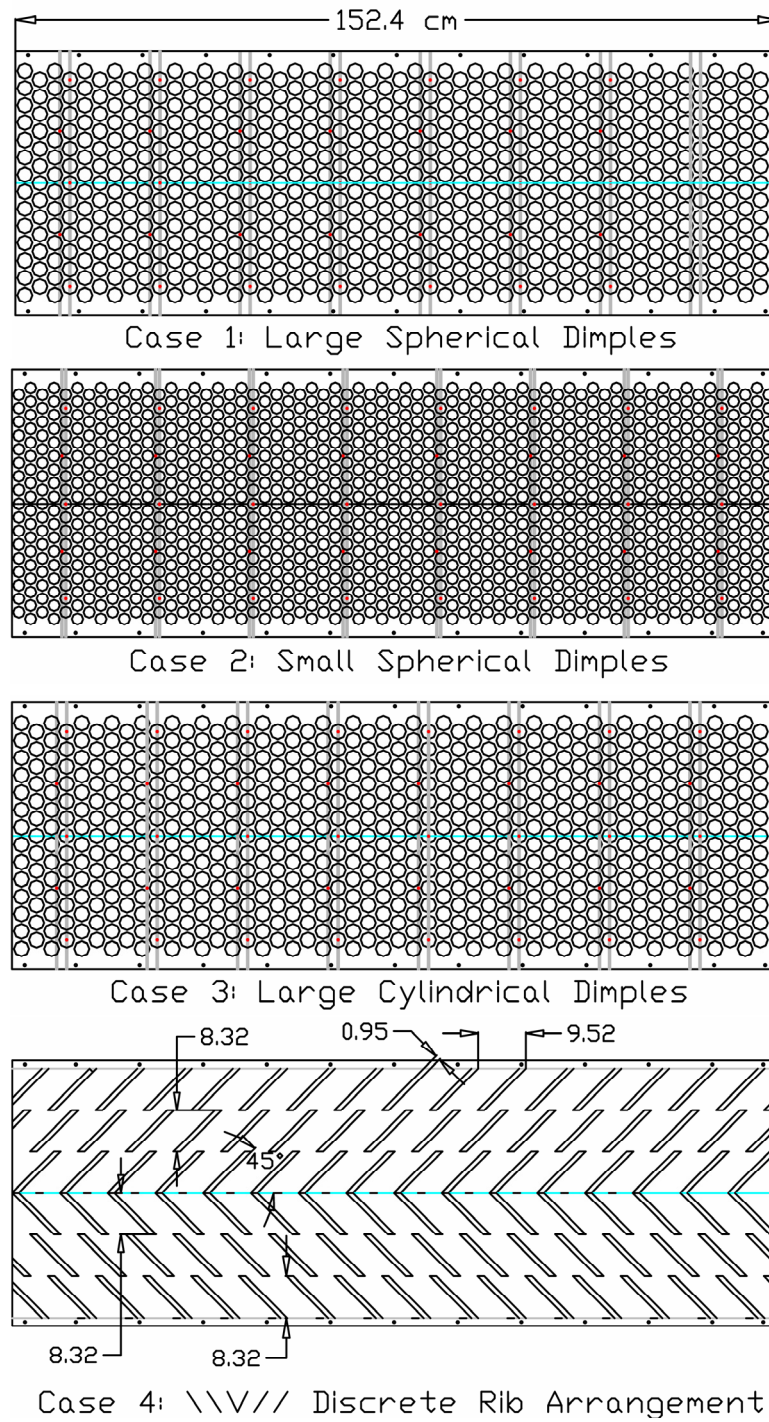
Turbulator layout on test wall for cases 1 to 4
